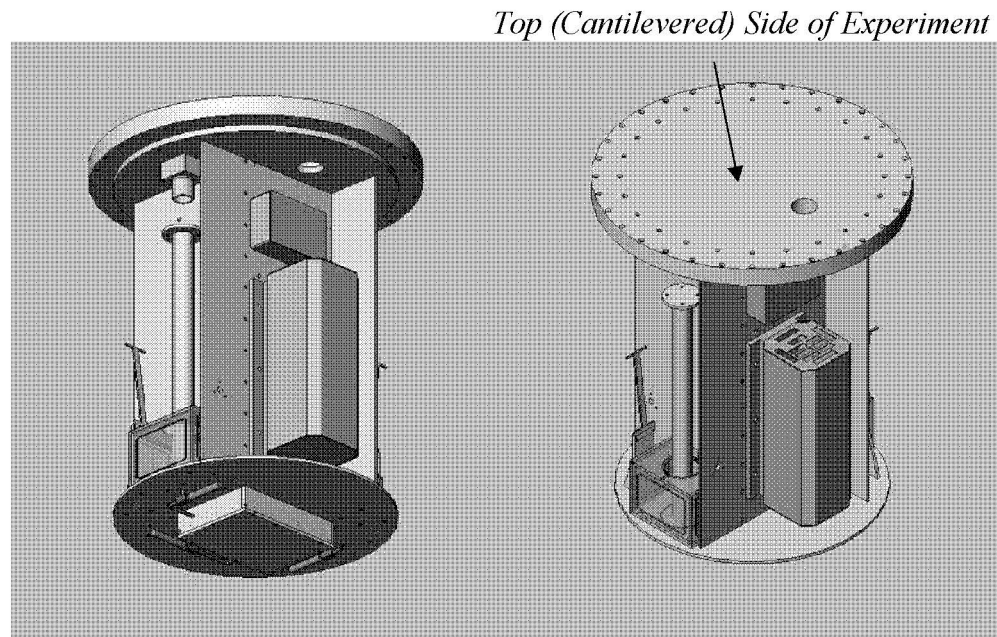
RIGEX Assembly Overview Drawing
